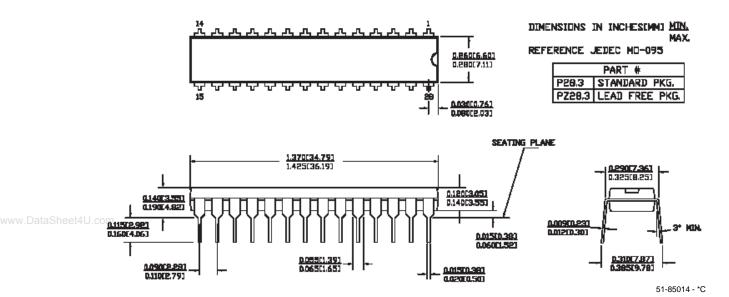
28-Lead (300-Mil) Molded DIP
